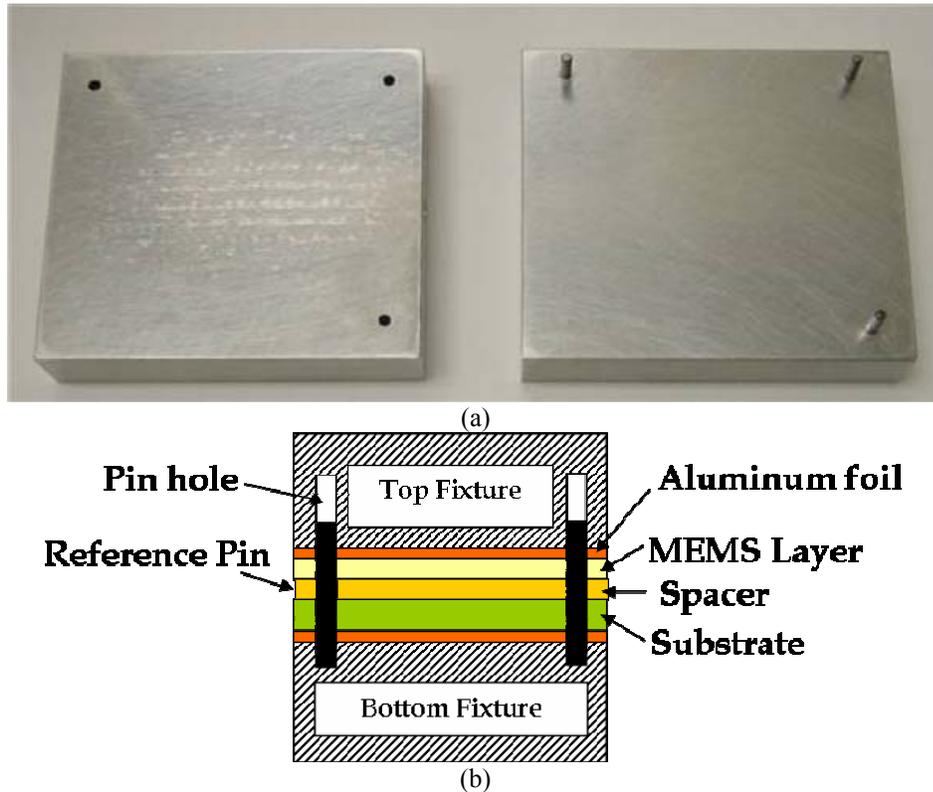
(a) Top view of the fixture, (b) Side view of the bonding setup.
